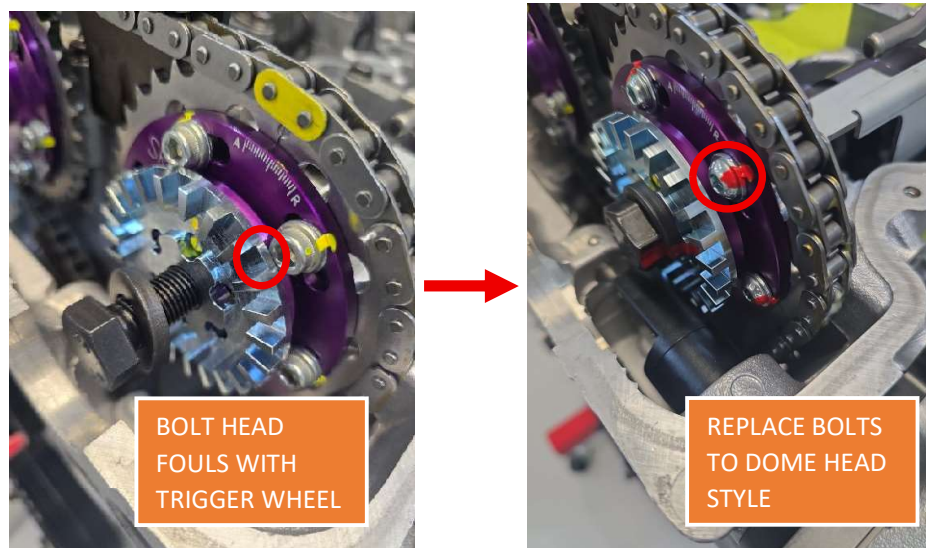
Check and Confirm Clearance to Bolt Head on Aftermarket Cam Gear
